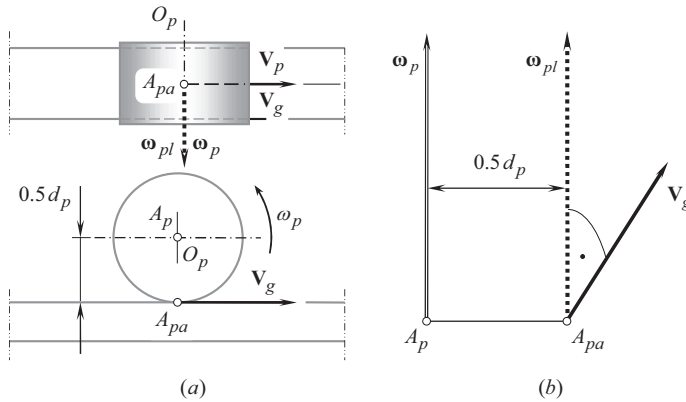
Example of (a) rotary-positive parallel-axes gear pair and (b) gear vector diagram for gearing of this kind.
